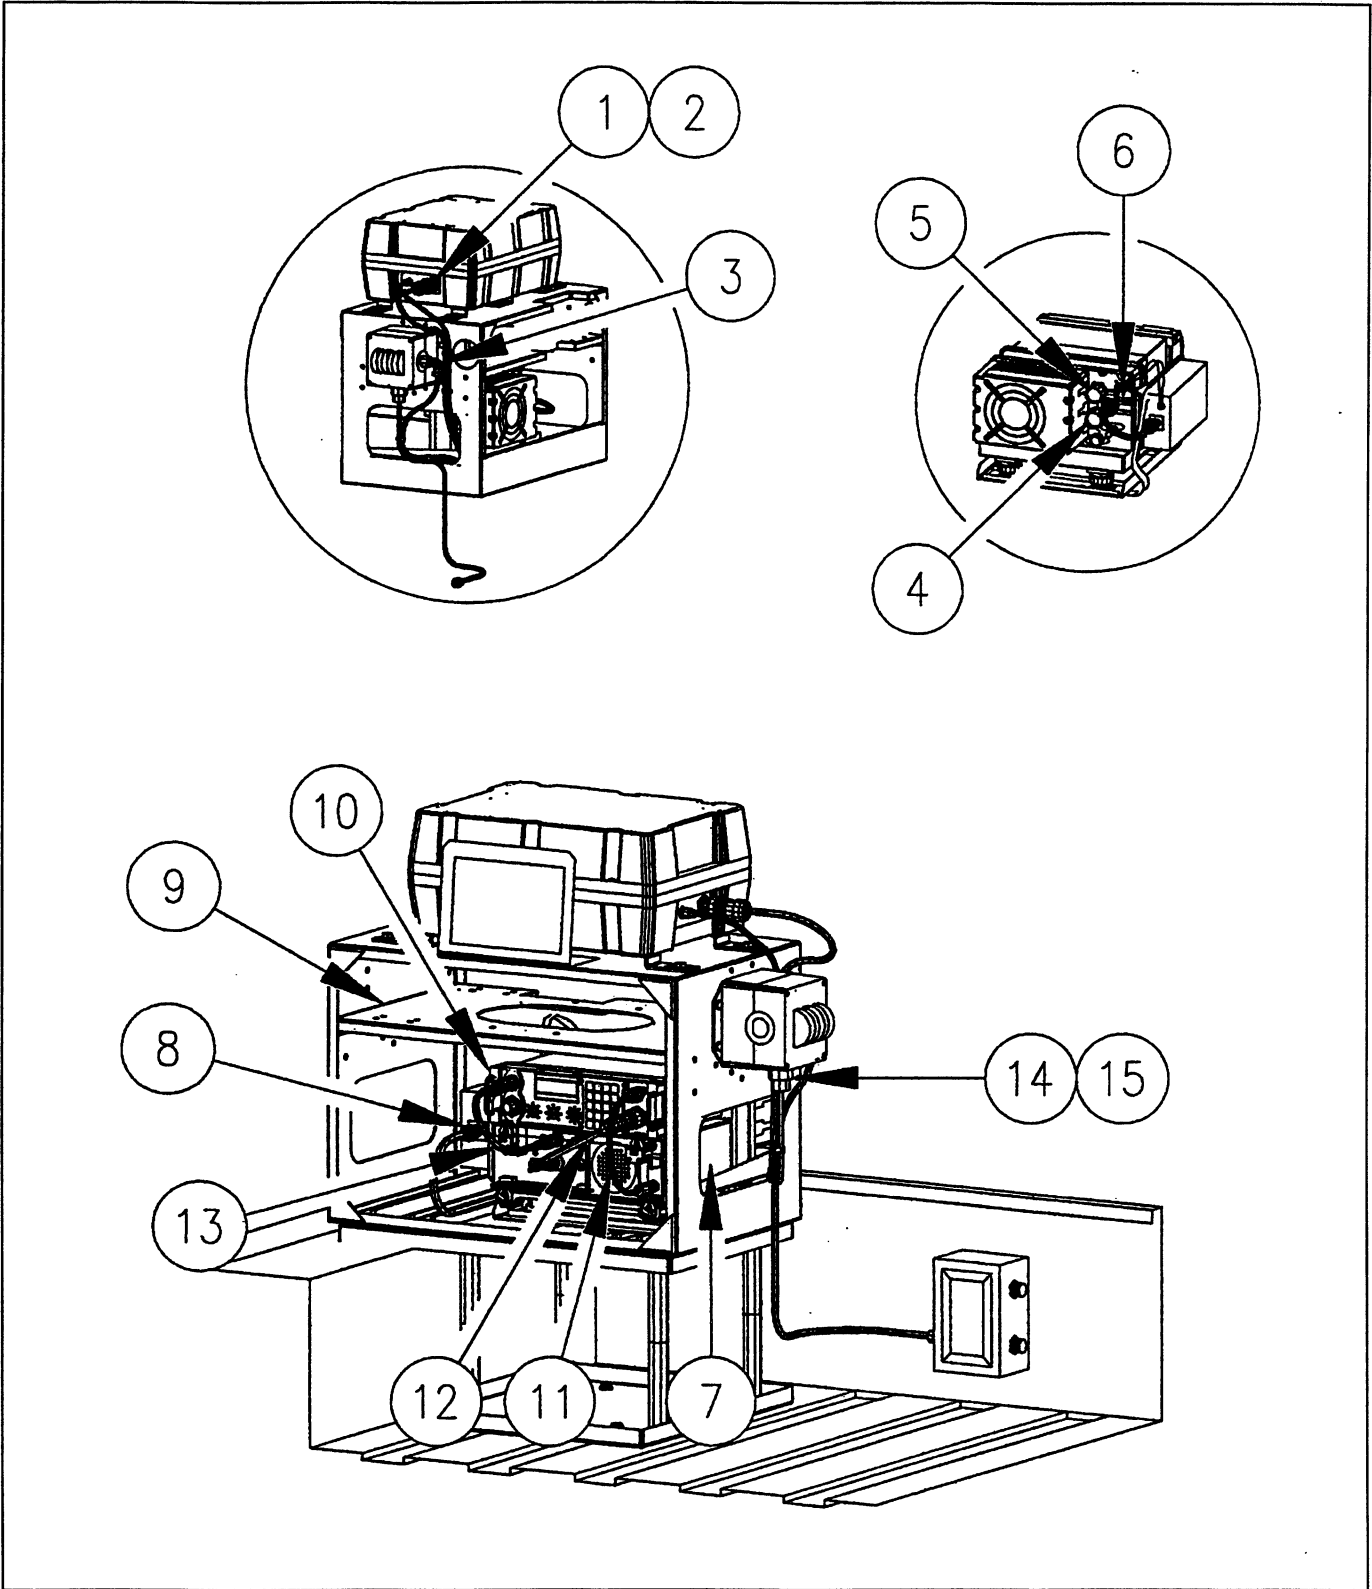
(Sheet 1 of 3) Equipment Installation and Cabling
